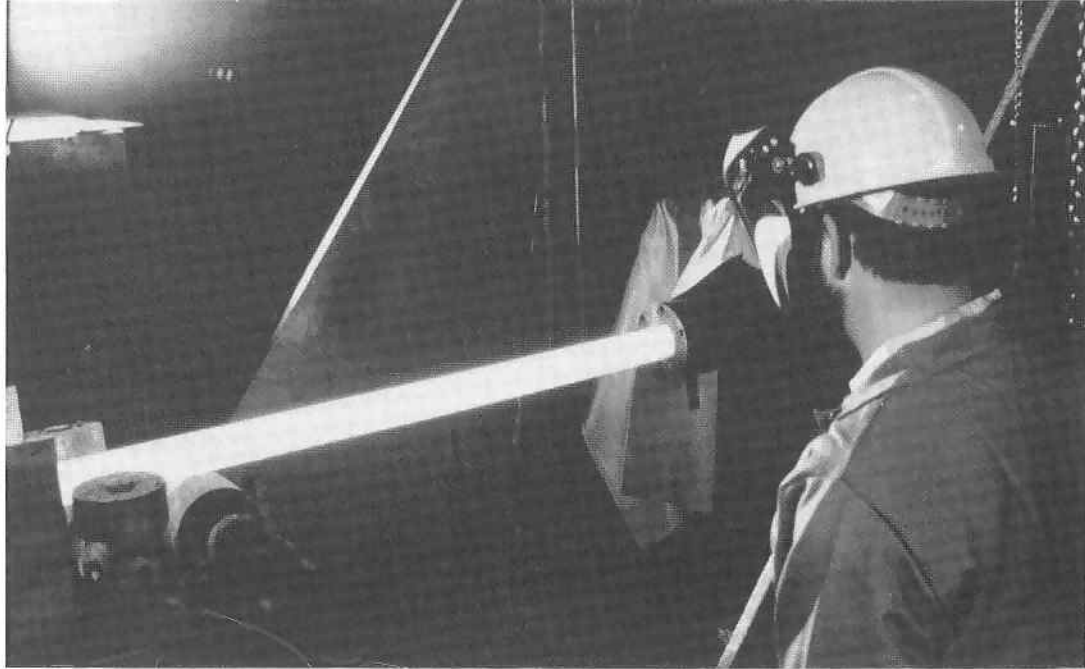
Continuous cast bar withdrawing from the horizontal caster cooler.
